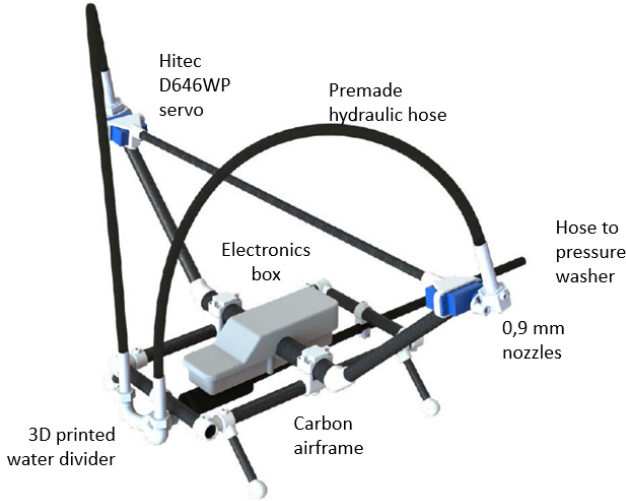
CAD drawing of the initial design of the drone. The frame is composed of carbon fibre rods and by 3D-printed joints.
